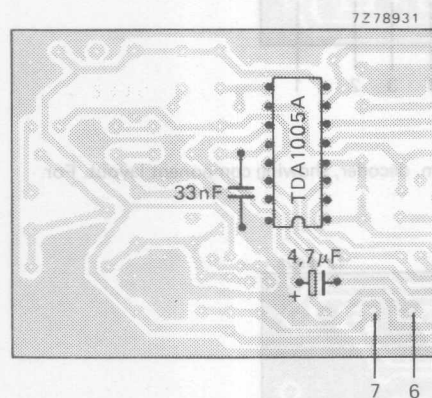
Printed-circuit board component side, showing component layout of Fig. 13.
